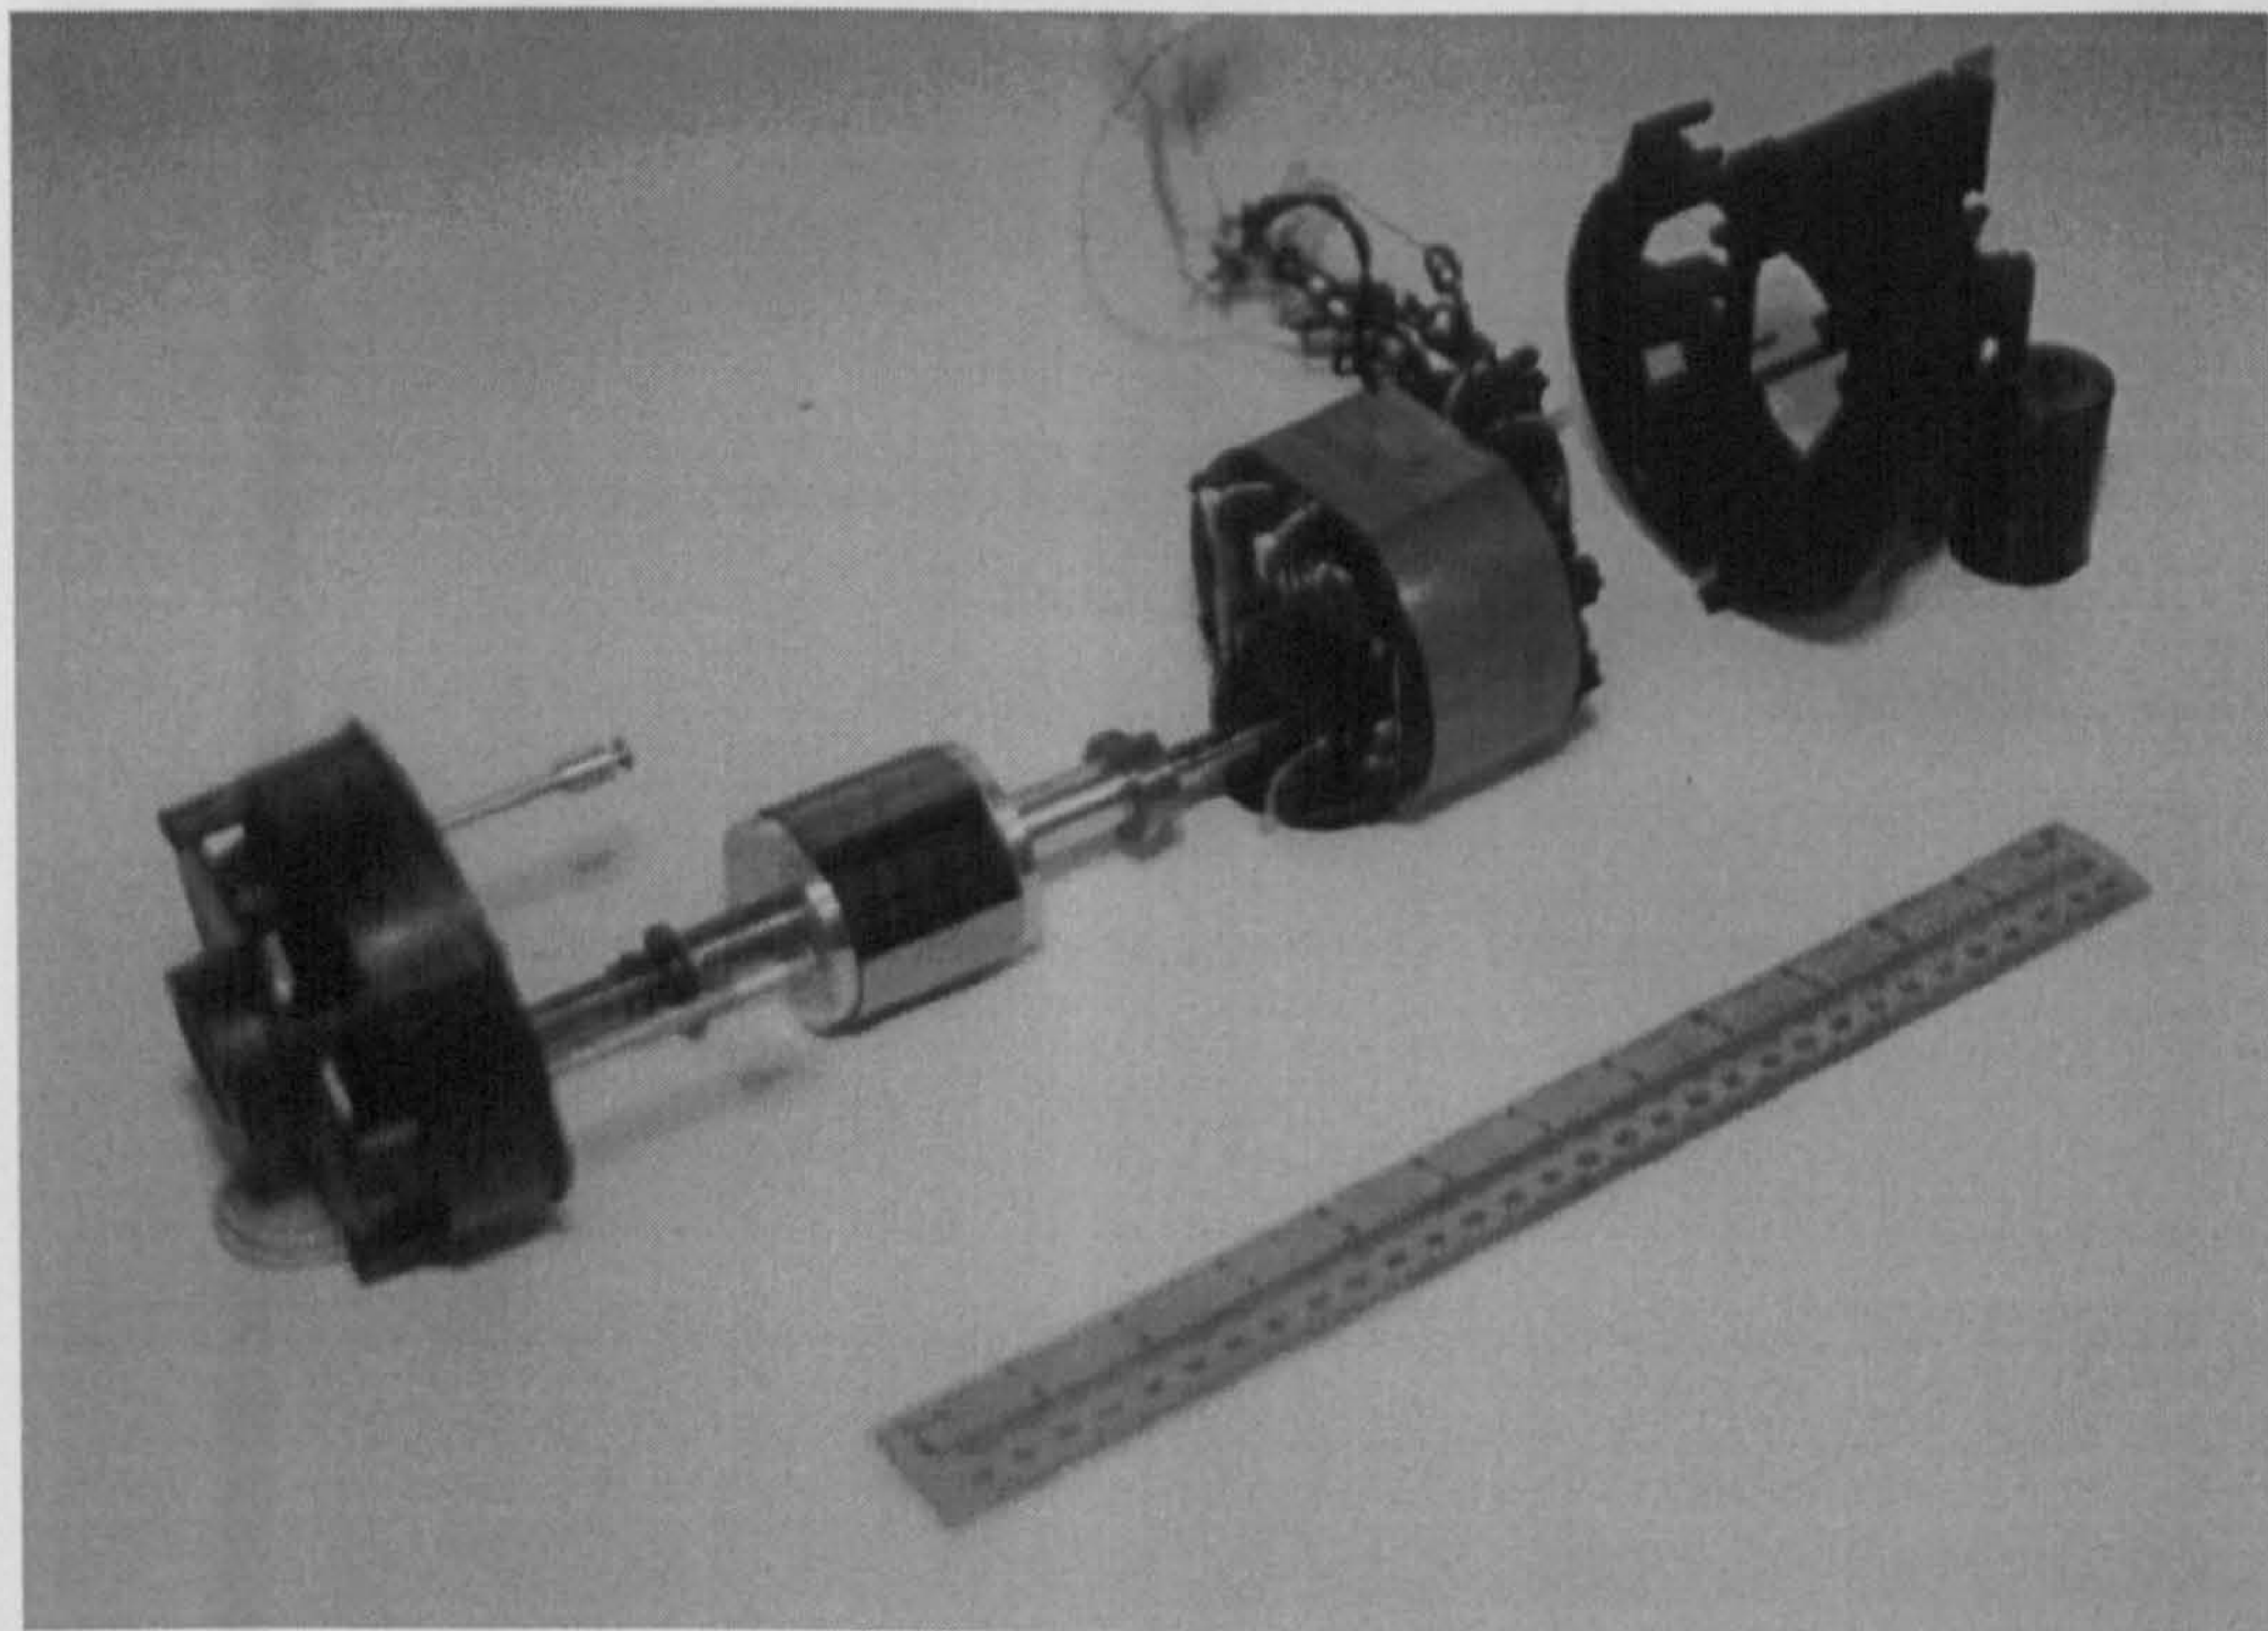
Prototype FRG complete assembly showing the stator, the rotor and the end-shields.
